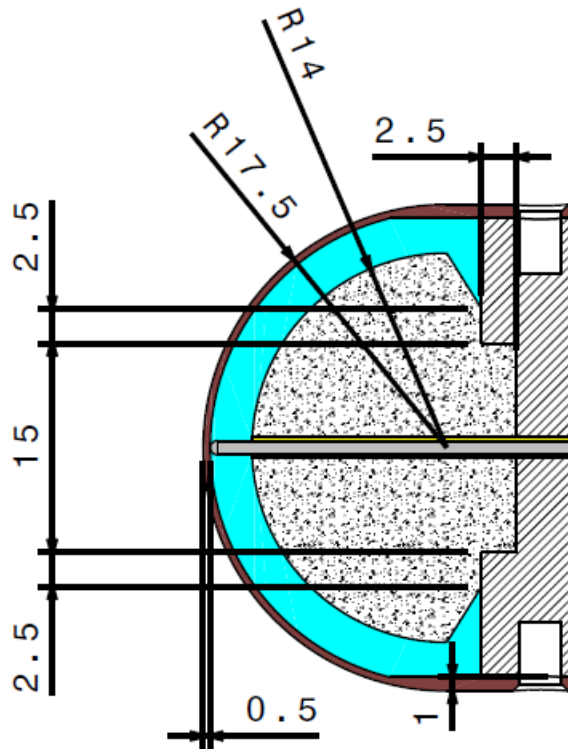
Dimensions of the cooling system, all dimensions in mm.
